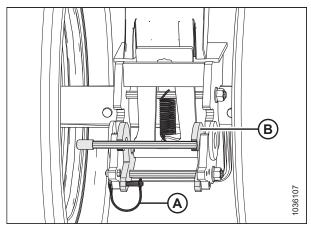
Left Transport Wheels – Rotation Lock Latch Engaged
